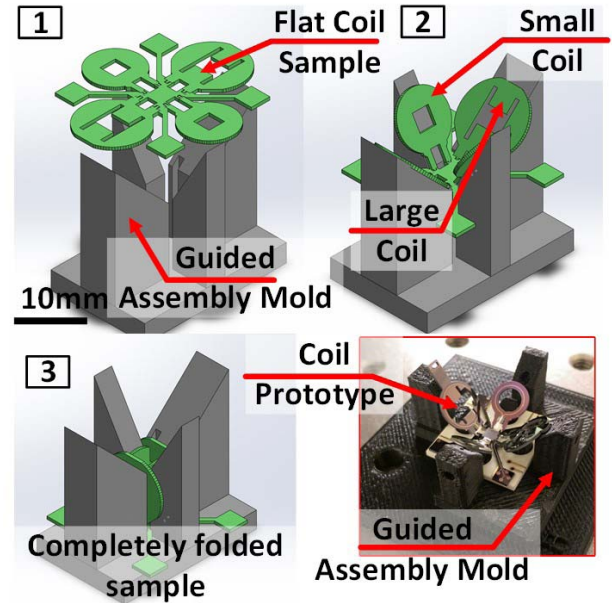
Sketch of the guided assembly process of the folded Helmholtz coils using a pre-defined mold, insert: a picture of a coil's sample inside a folding mold prototype created using 3D printing.
